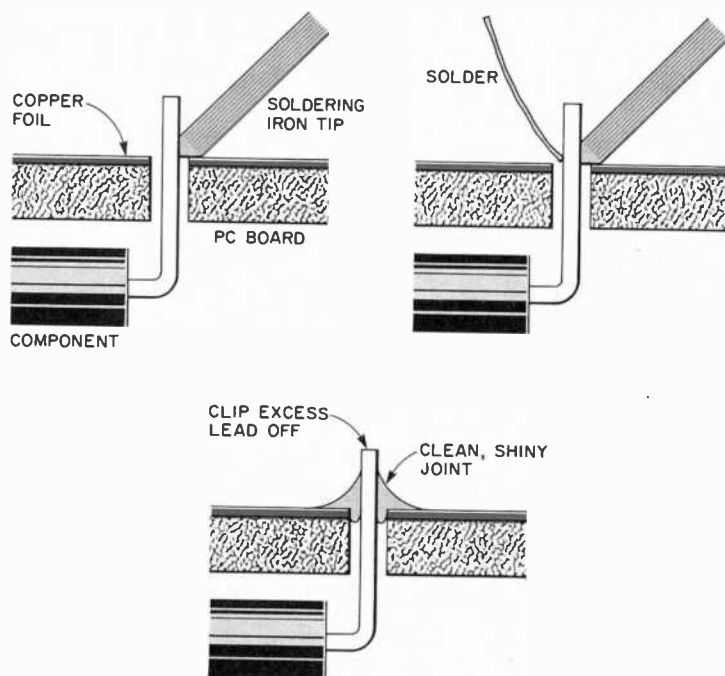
Steps in soldering. Place heated iron to junction of parts to be soldered (top left) Bring flux-cored solder to the joint after it is hot enough to melt solder (top right) When a smooth-contoured fillet has formed, remove the solder and allow to cool without moving.
